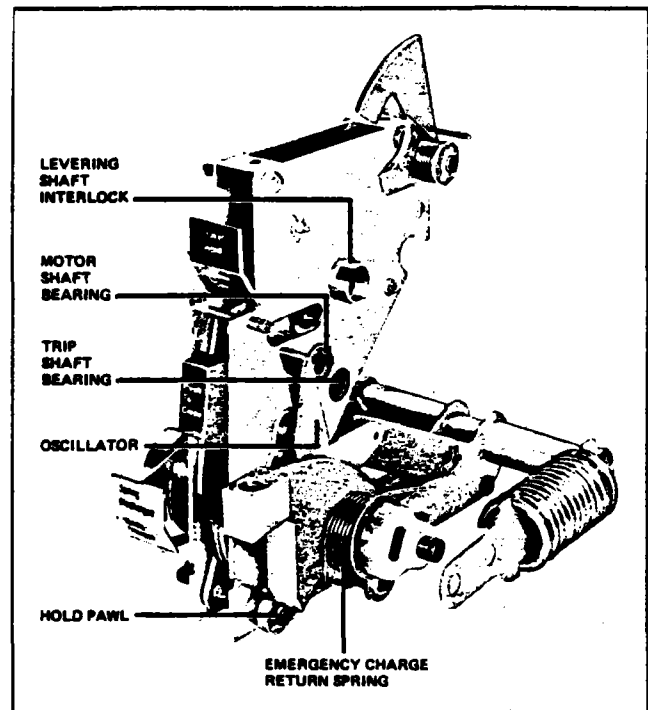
Front View of Mechanism (Power-Operated Spring Charge) (385301)
